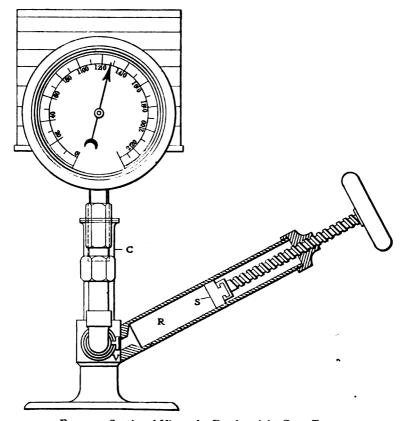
Sectional View of a Dead-weight Gage Tester.
